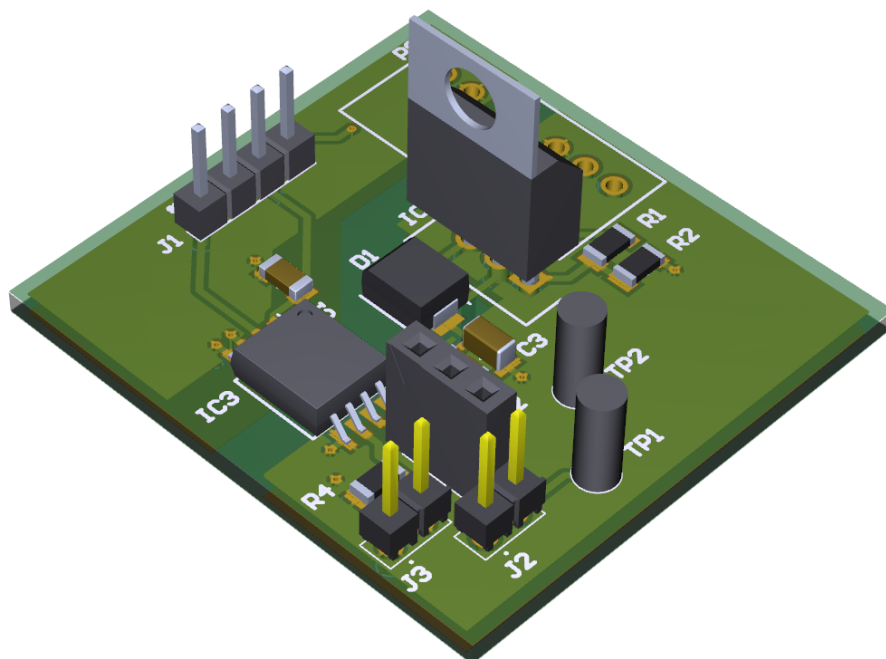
The 3D view of PCB layout for the unipolar gate driver.
